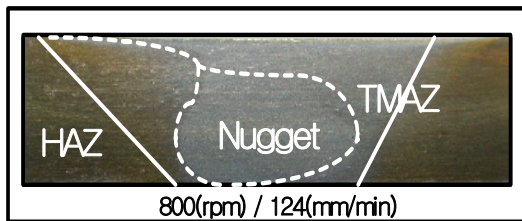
Welded transverse cross-section macrostructures according to the rotation speed 800rpm and the transition speed 124mm/min with full screw type tool.
